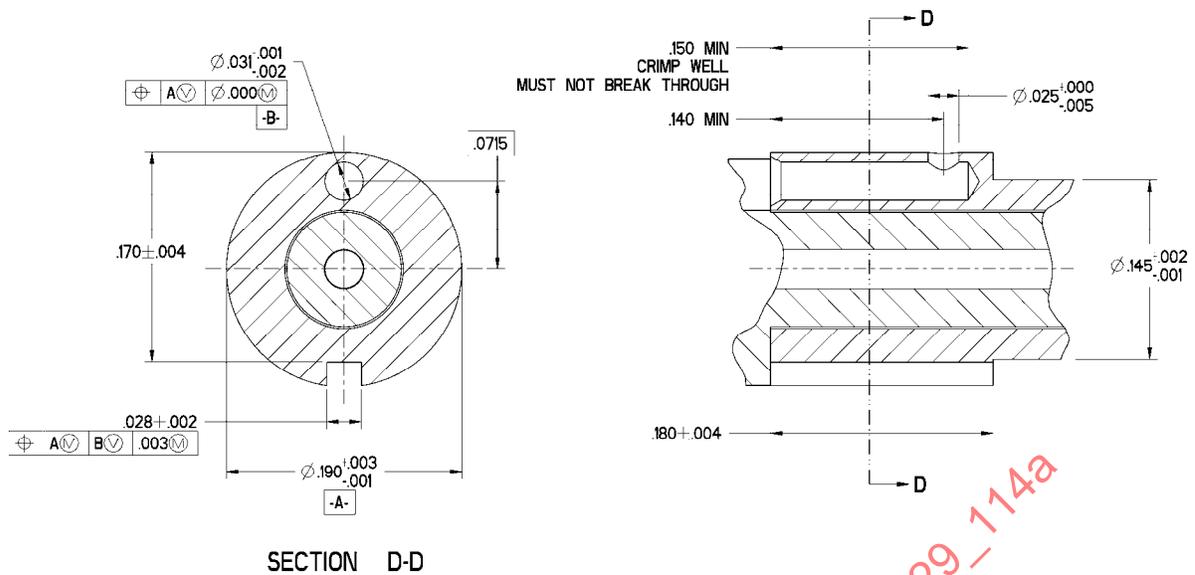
BIN CODE 628: UNASSEMBLED CONCENTRIC TWINAX INTERMEDIATE CONTACT PIECE PART
